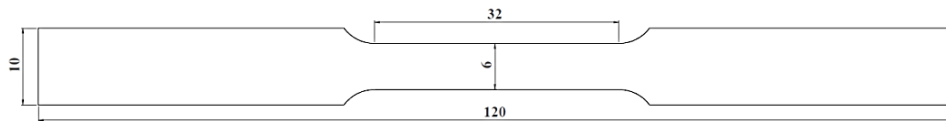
Geometry of the uniaxial tensile specimen. All dimensions are in millimeters.
